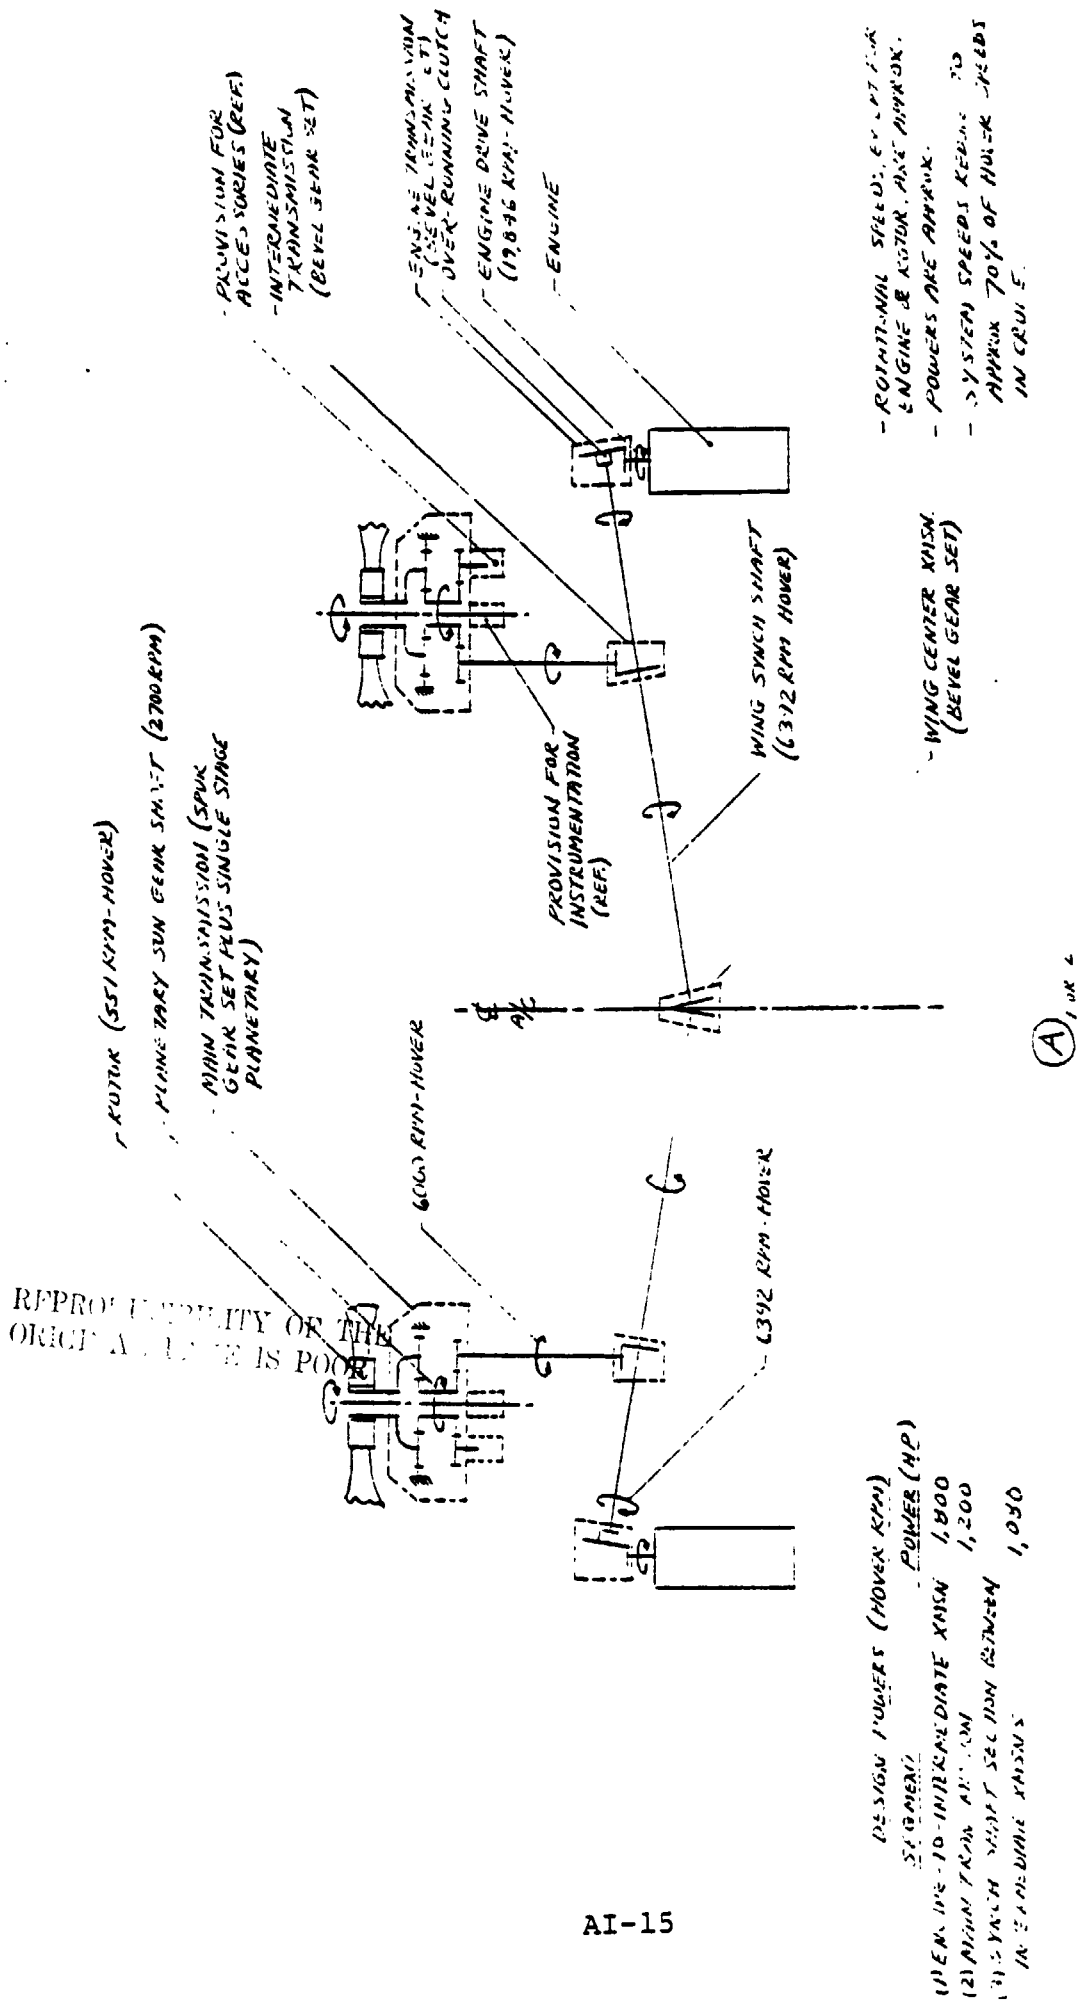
DRIVE SYSTEM FOR FIXED ENGINE NACELLE - 7 GEARBOXES/26 GEARS - DRIVE EFFICIENCY (TWIN ENGINE) ≈ 97.7%
